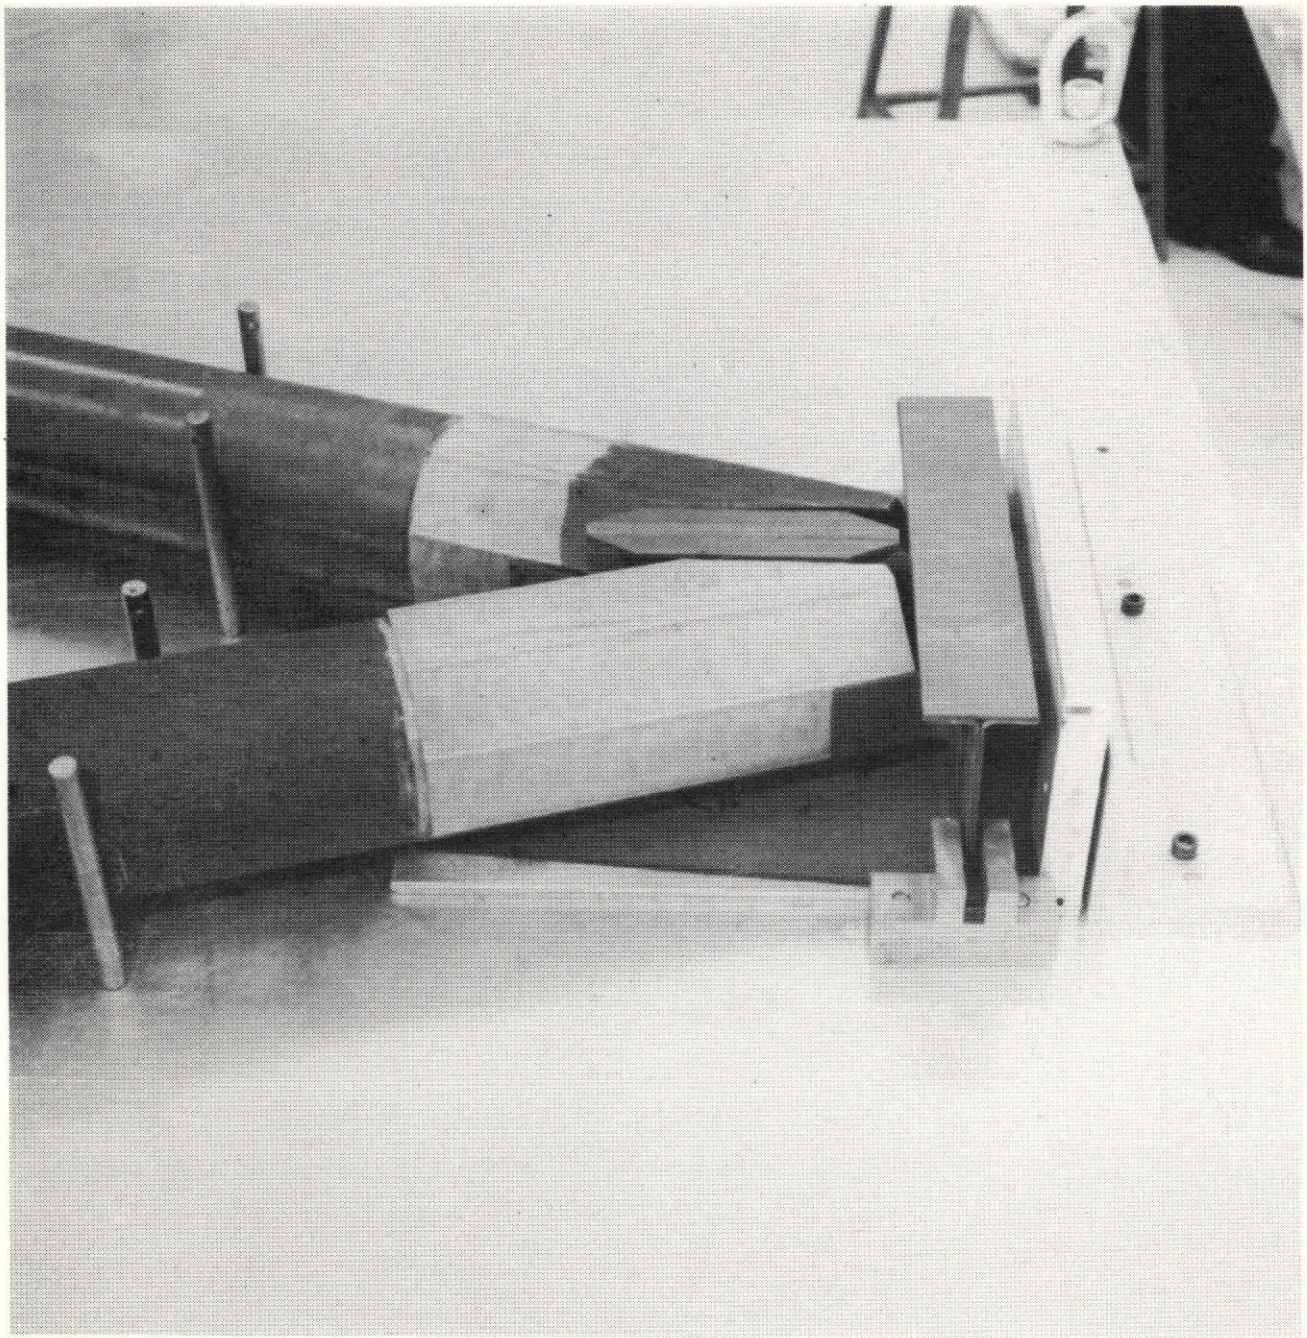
Details Pre-Fit-Two Member Truss Assembly
